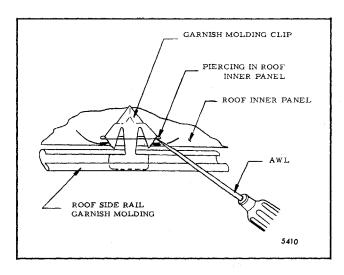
Roof Side Rail Garnish Molding Attachment - E Styles Typical
